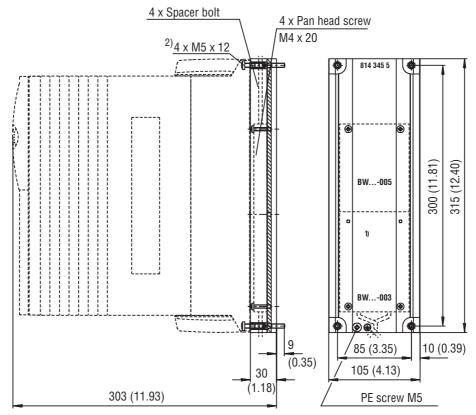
DKB11A Heat sink for brake resistors in flatpack design, dimensions in mm (in)
